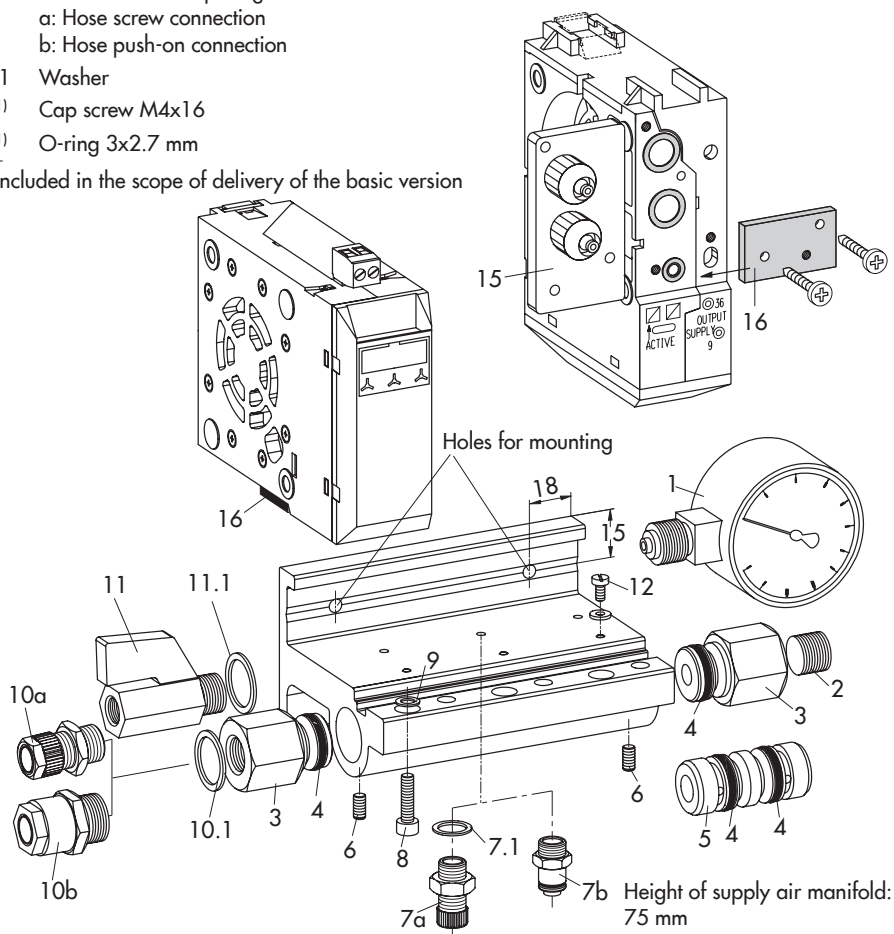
Exchanging the connecting plate in the converter (top) · Assembling the supply air manifold (below)
